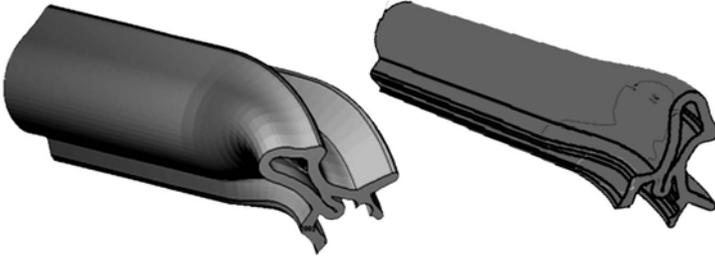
CAD 3D model enables to check local deformations as wrinkles and waviness caused by installation design (for instance, too small radius).
